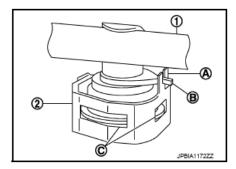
Identifying Fuel Tube, Cut-Out, Clip And Projection Courtesy of NISSAN NORTH AMERICA, INC.
